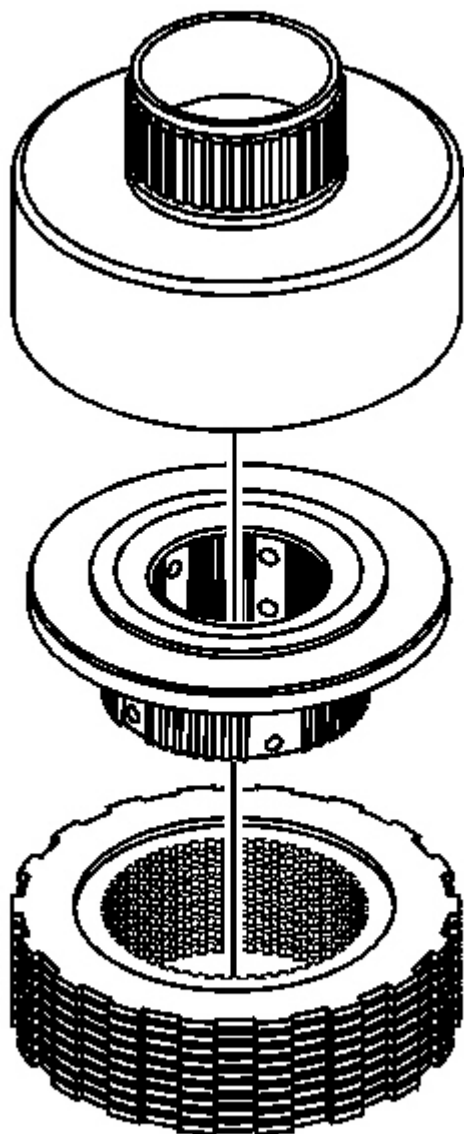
Removing Clutch Hub Retaining Ring
